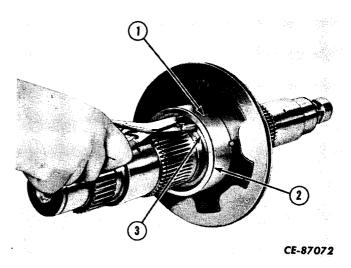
PRINTED IN UNITED STATES OF AMERICA
